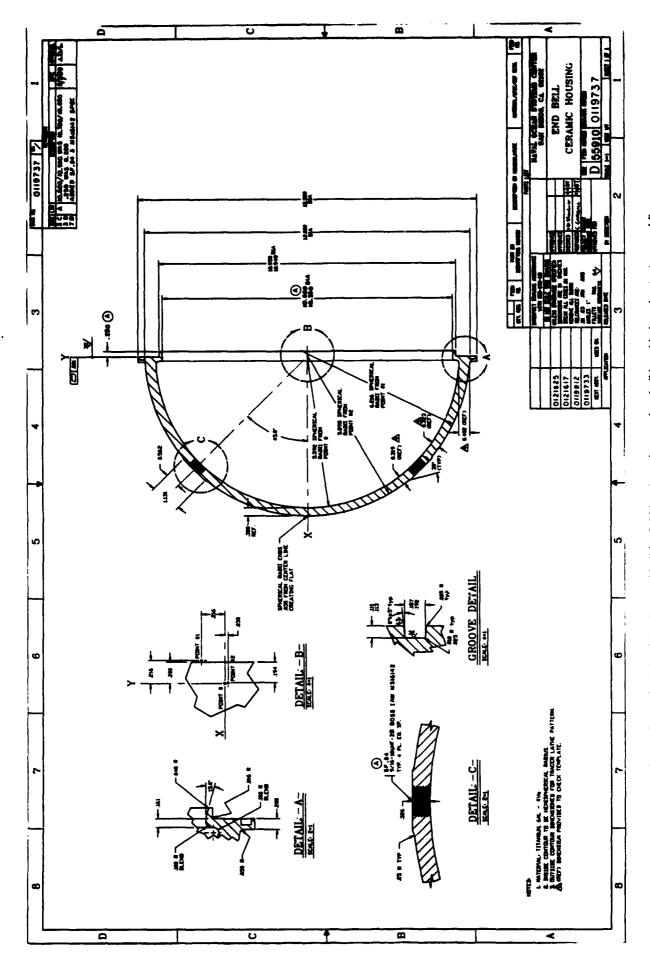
Optimized titanium end bell for 9,000-psi service used as bulkhead in housing test assemblies.
